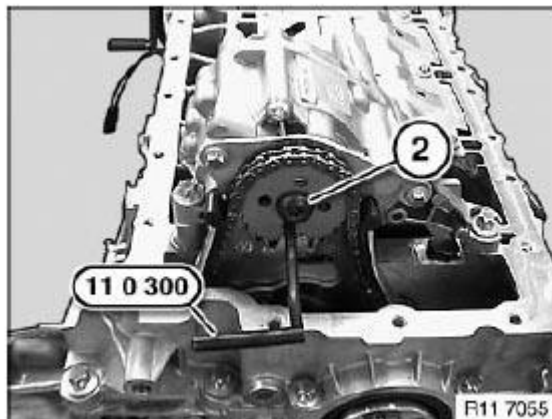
Identifying Sprocket Wheel Bolt And Special Tool 11 9 190
